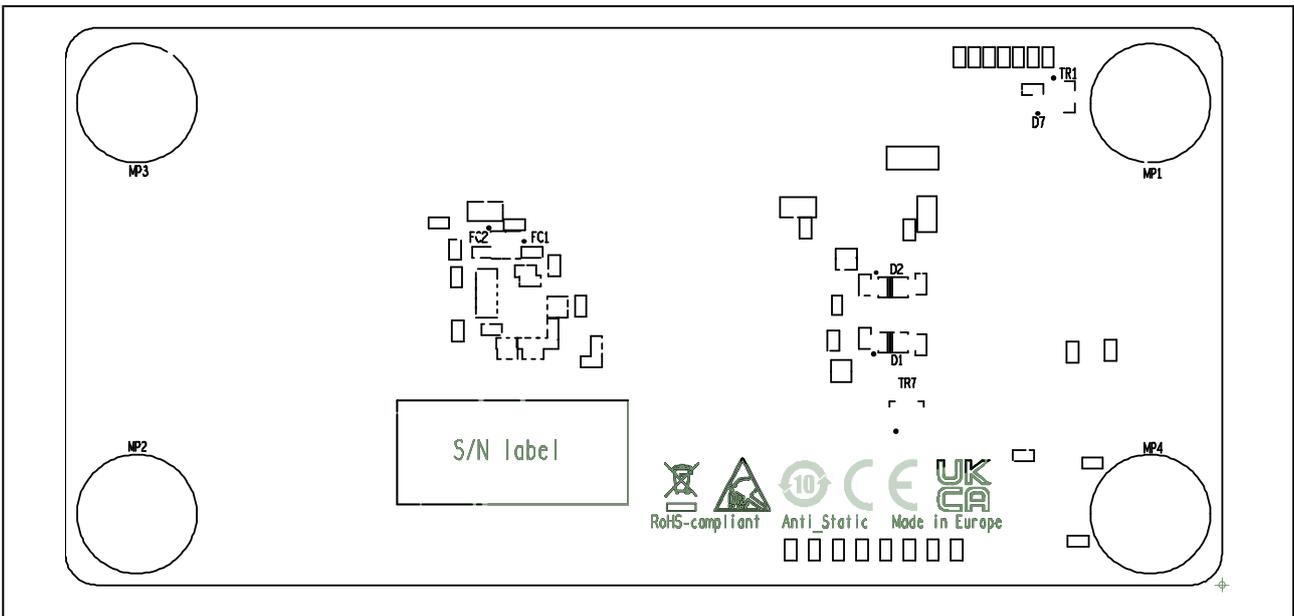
Placement of components on the bottom side of the target board for board version D020090_06_V03
